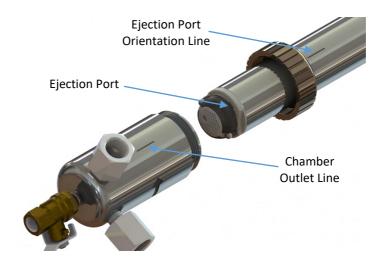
Sensor ejection port is identified by the engraved line on sensor sleeve. This line must be aligned with the engraved outlet line on the chamber during installation.
